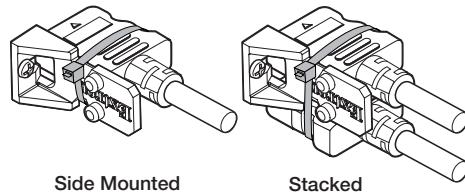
LockIt Cable Lacing Bracket Mounting Options
